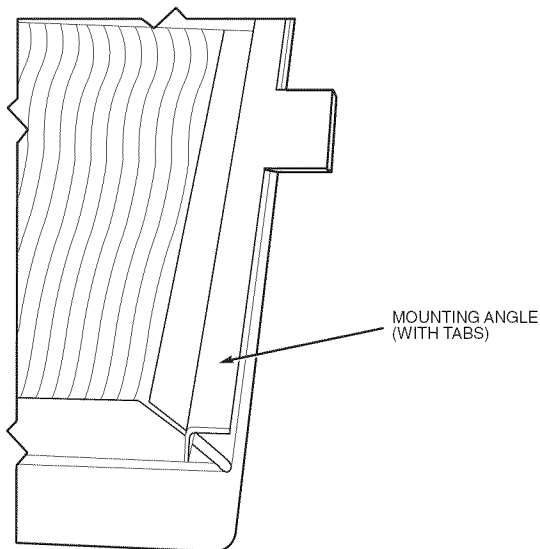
Mounting Angle (With Tabs) Attached to Filter Track Assembly
